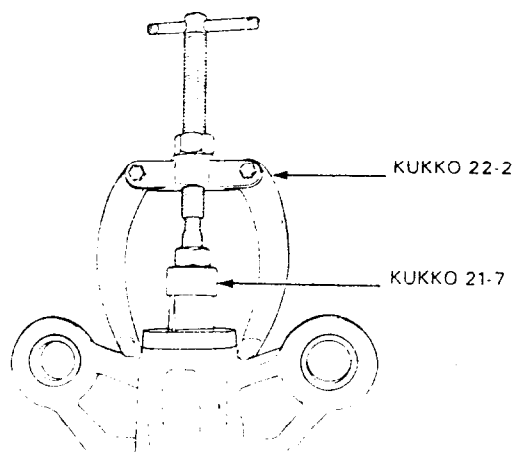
Removal of Inner Bearing from Pinion Shaft
